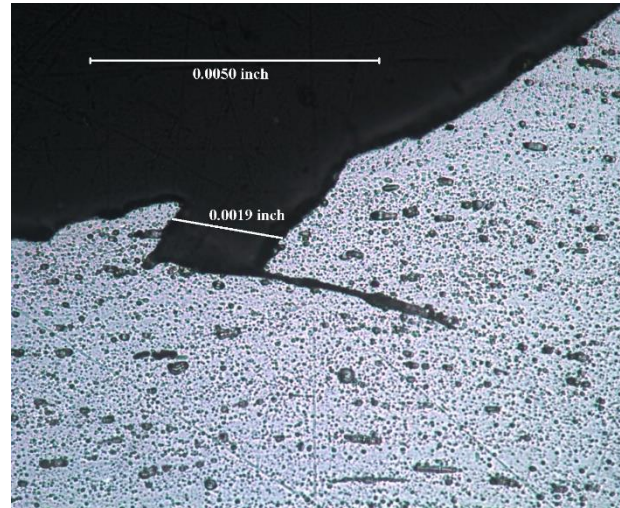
400X Fatigue Crack Thread Root
